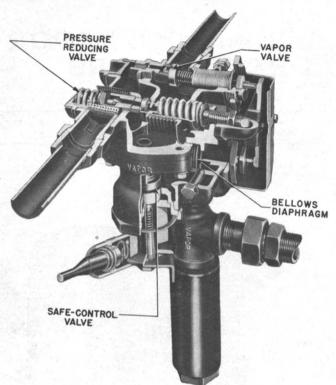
Sectioned view showing the pressure reducing valve and the vapor valve in the No. 955 Regulator.
